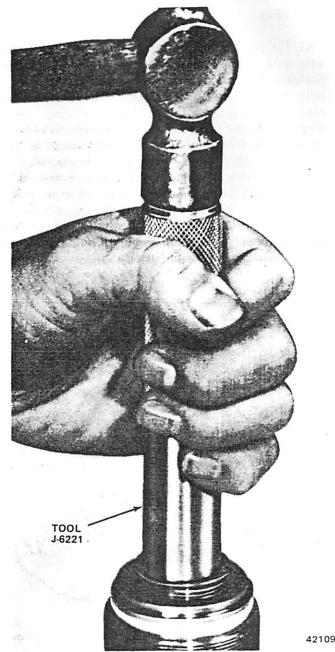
L-25 Adjuster Plug Needle Bearing Removal/Installation
